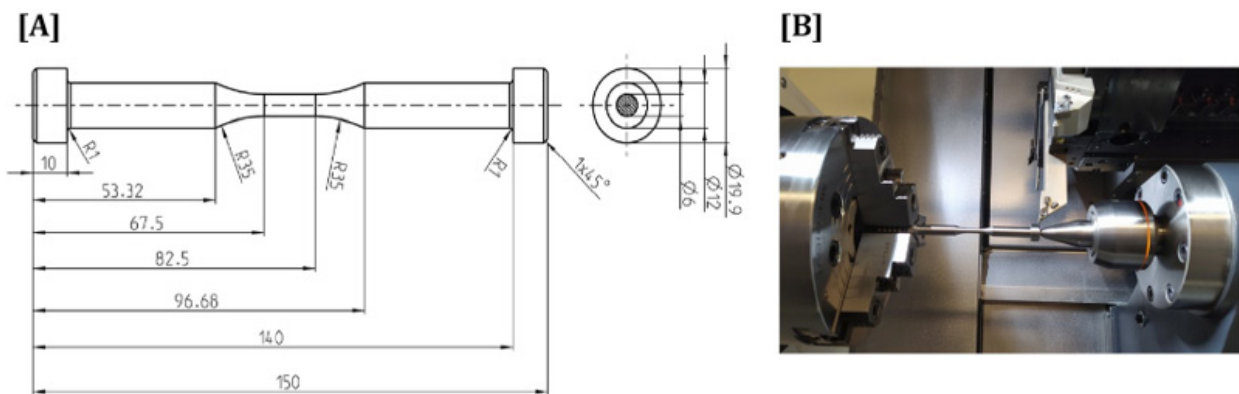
Dimension of the specimens [A] and specimen manufacturing in the lathe [B]
